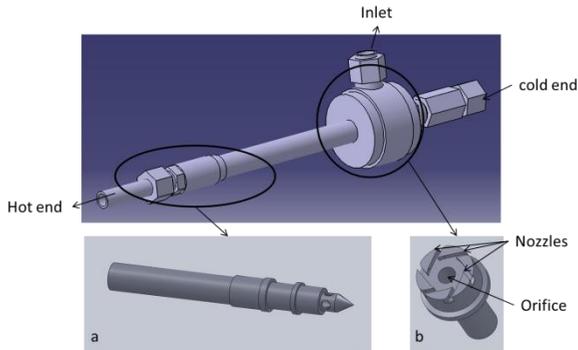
(a) Conical valve and (b) Swirl generator in RHVT
